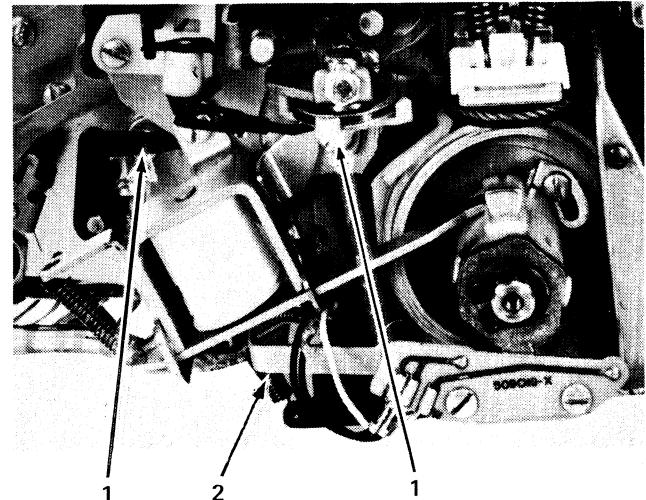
Shift Cam Removal (Right Side of Printer)
